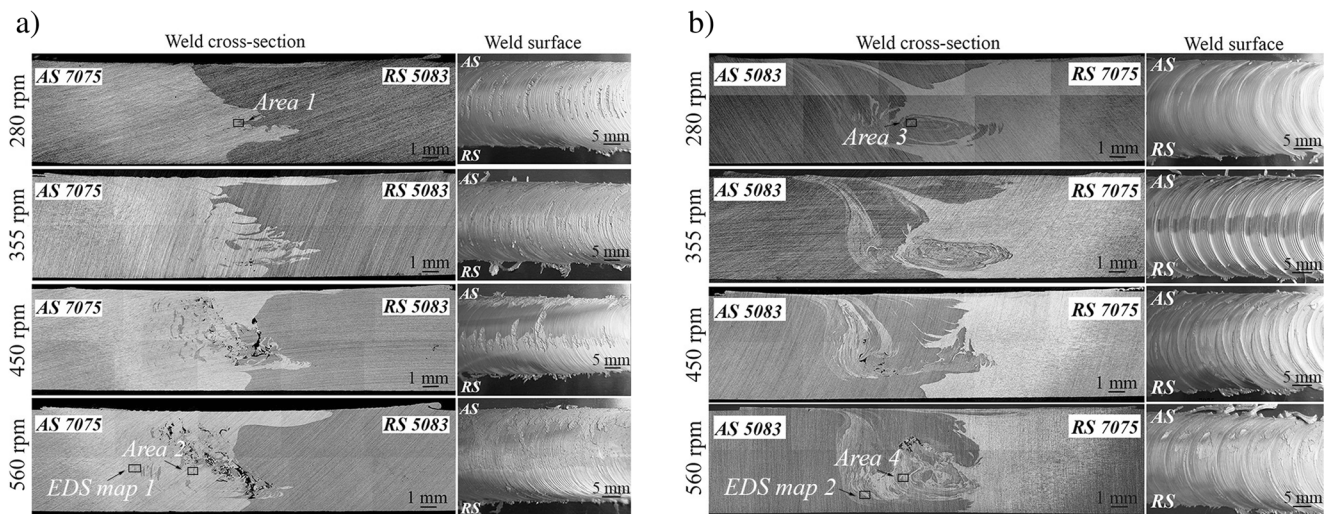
Macrographical view of the cross-section and top surface of a AS 7075–RS 5083 welds and b AS 5083–RS 7075 welds (AS—advancing side, RS—retreating side), with marked areas of microstructural analysis; Triflute pin
